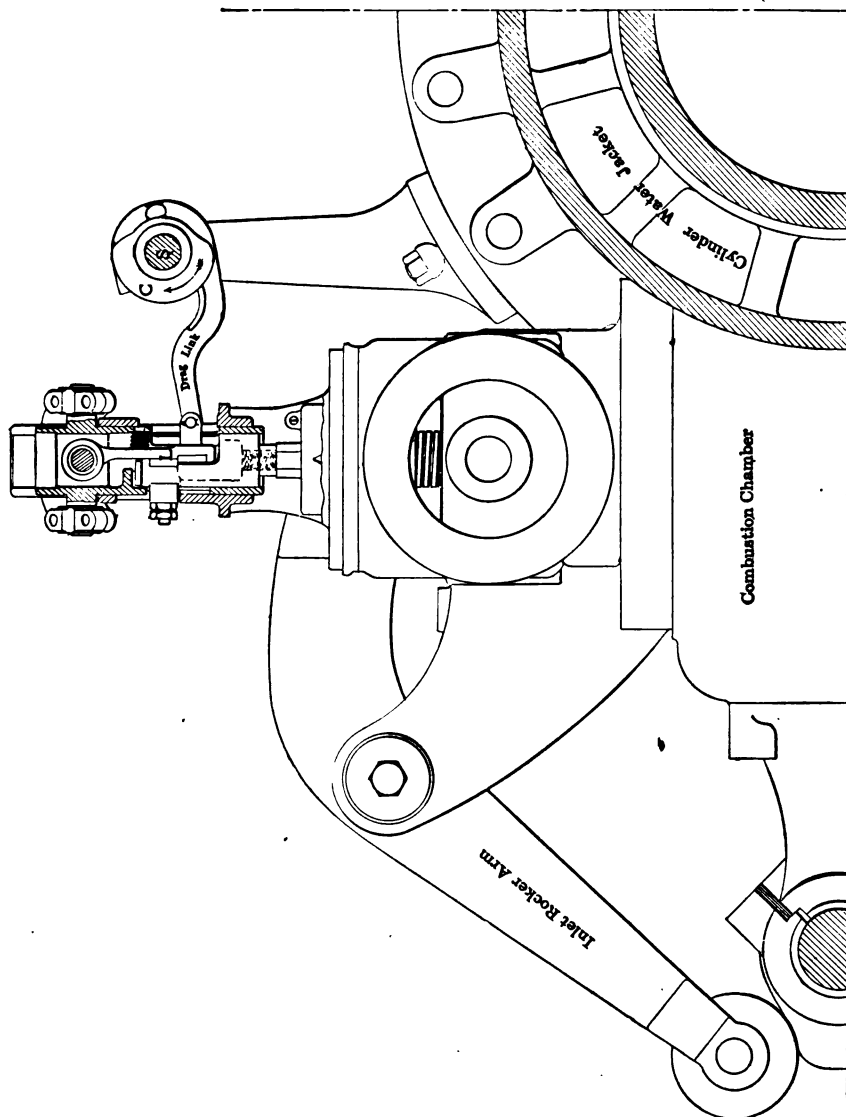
END ELEVATION OF INLET AND CUT-OFF VALVE MECHANISM.
